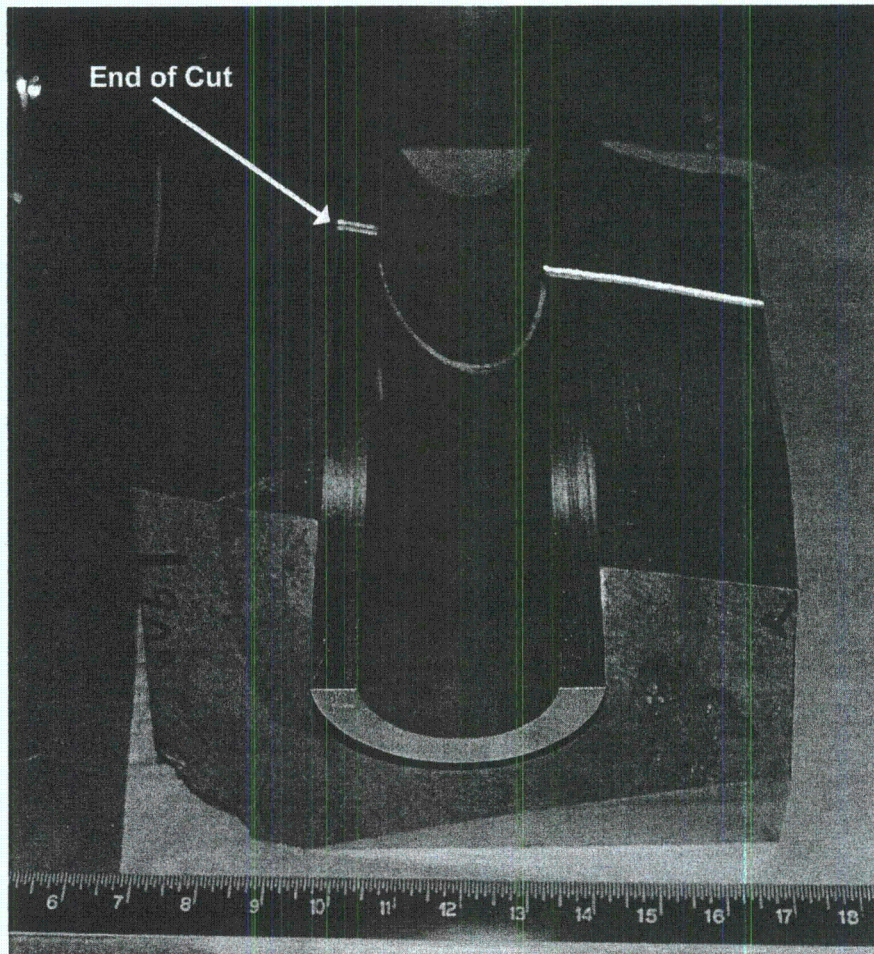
End of J-groove Weld Removal Cut
